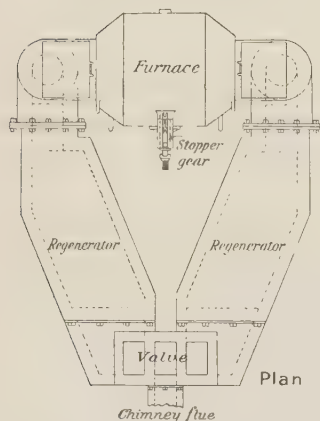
Small Oil-fired Open-hearth Furnace with removable hearth. (Carr's design.)
